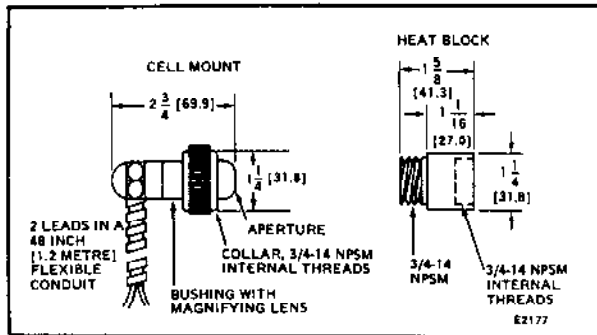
INSTALLATION DIMENSIONS OF THE 817-1742 INFRARED FLAME DETECTOR (in in.).
